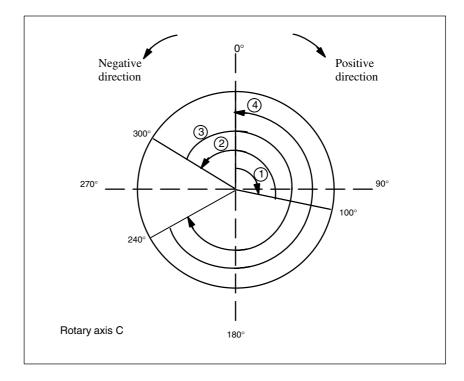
Examples of absolute dimension programming for modulo axes
